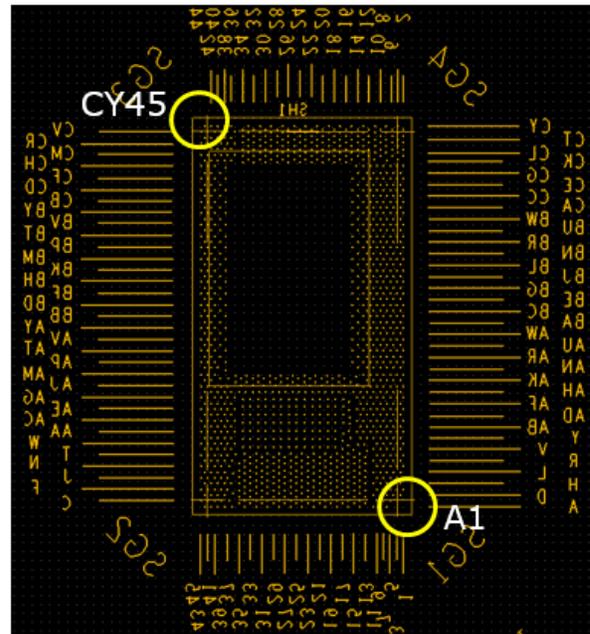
Top views of the package Land Pattern on the Mechanical Shock test Board with the monitored package corners shown by yellow circles.
